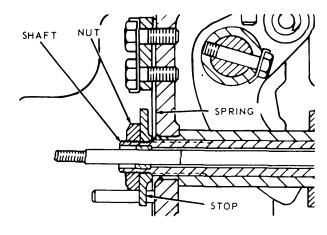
Fuel rack setting gage install on front end of fuel rack.
